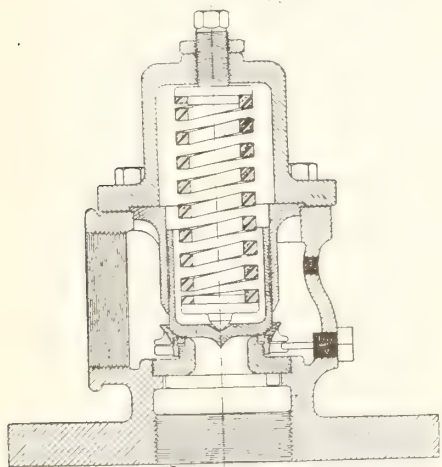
STEAM SAFETY VALVE OF APPROVED DESIGN.
